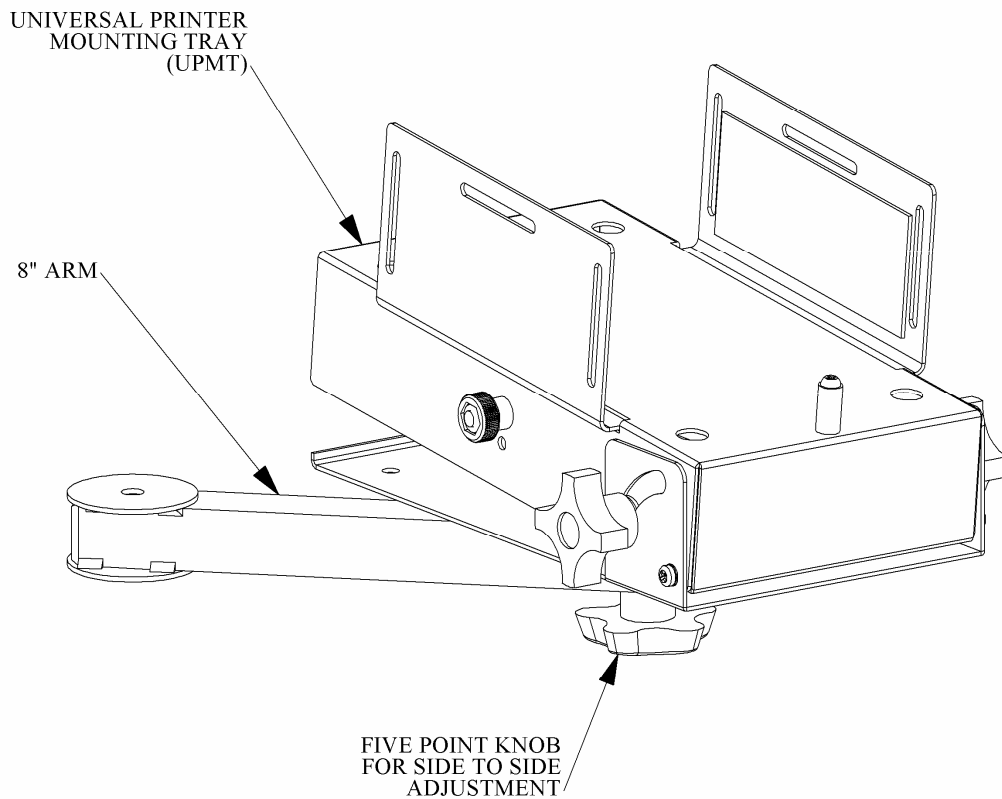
An 8" arm and a Universal Printer Mounting Tray
